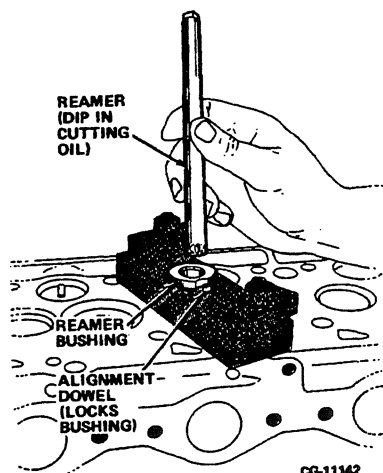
Set Up for Reaming Valve Guide Insert Bore in Cylinder Head
